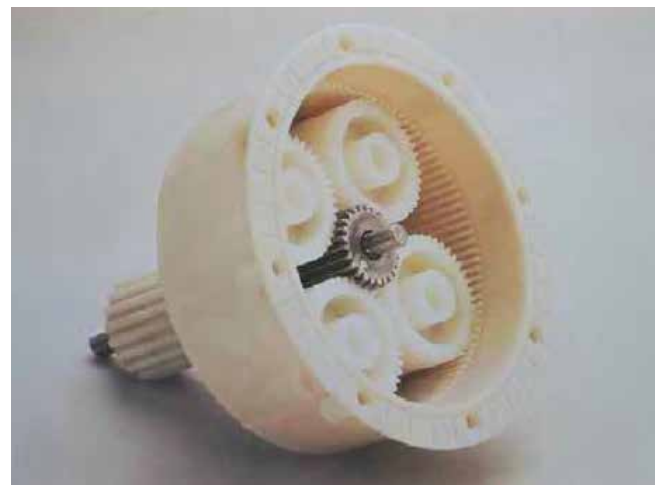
The Whirlpool “splutch” used molded plastic gears to reduce parts count and extend the life of the World Washer. The gears are molded in Celcon® acetal copolymer.
